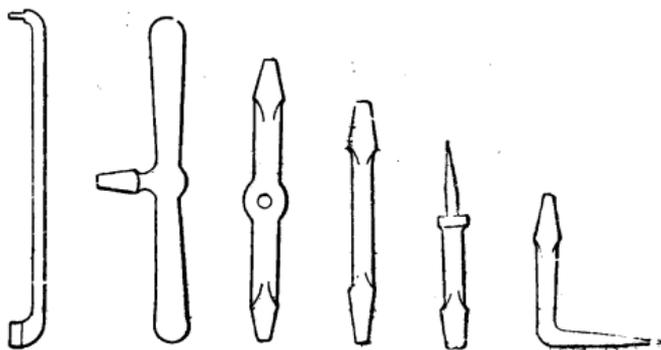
Fig. 679. Fig. 680. Fig. 681. Fig. 682. Fig. 683.
